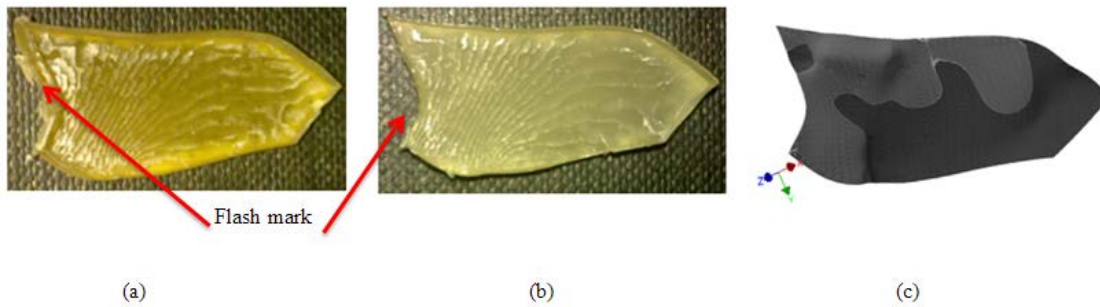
(a) PLGA 50:50, (b) PLGA 65:35 and (c) CAD model of the fracture plate.
